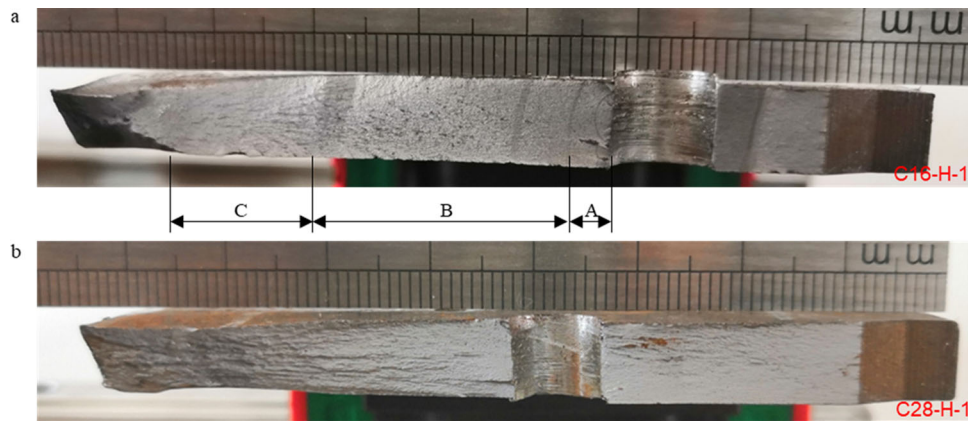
Cross-section view along the crack surface: a) specimen C16-H-1; b) specimen C28-H-1.
